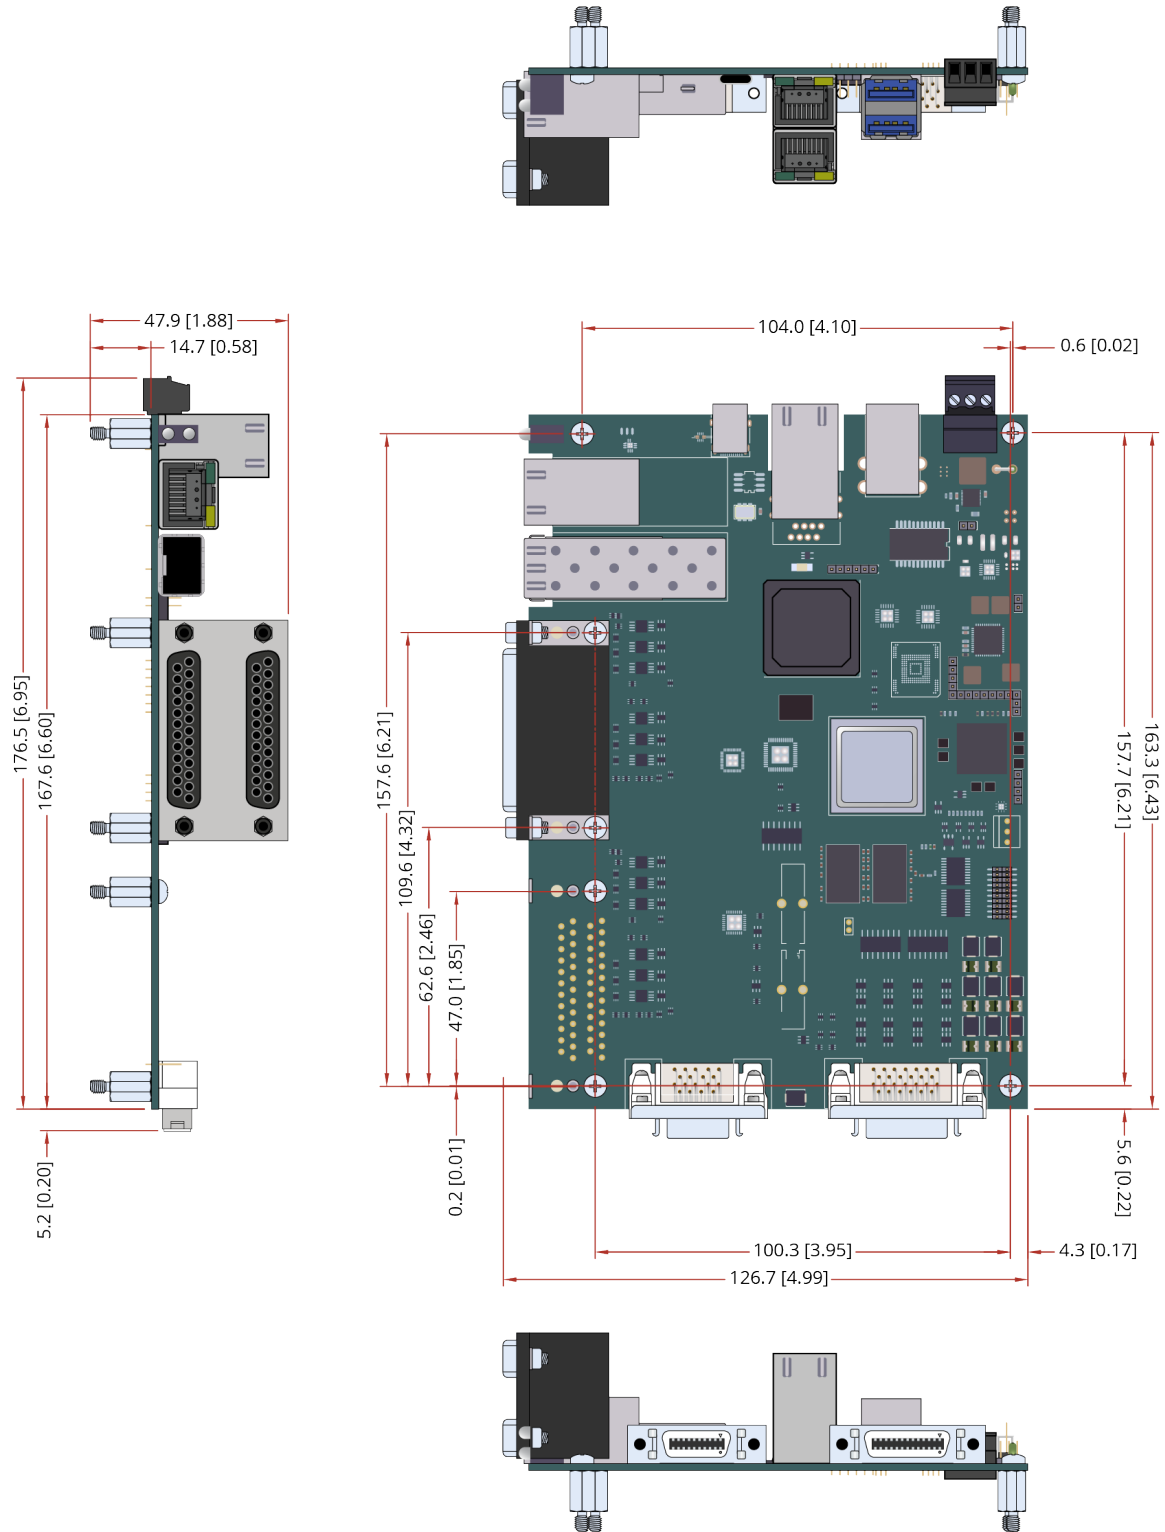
Dimensions [-4P1 (Standard 4-Axis)]
